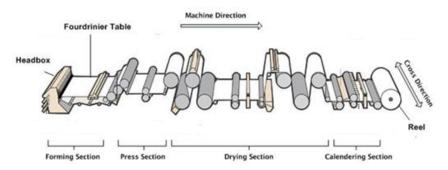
Basic scheme of paper making machine (Chu et al., 2011).
